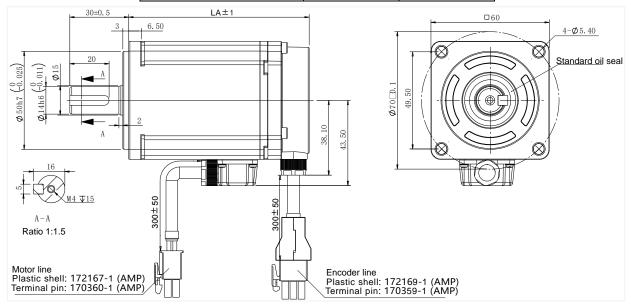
Installation dimension of WD series 60 flange servo motor
